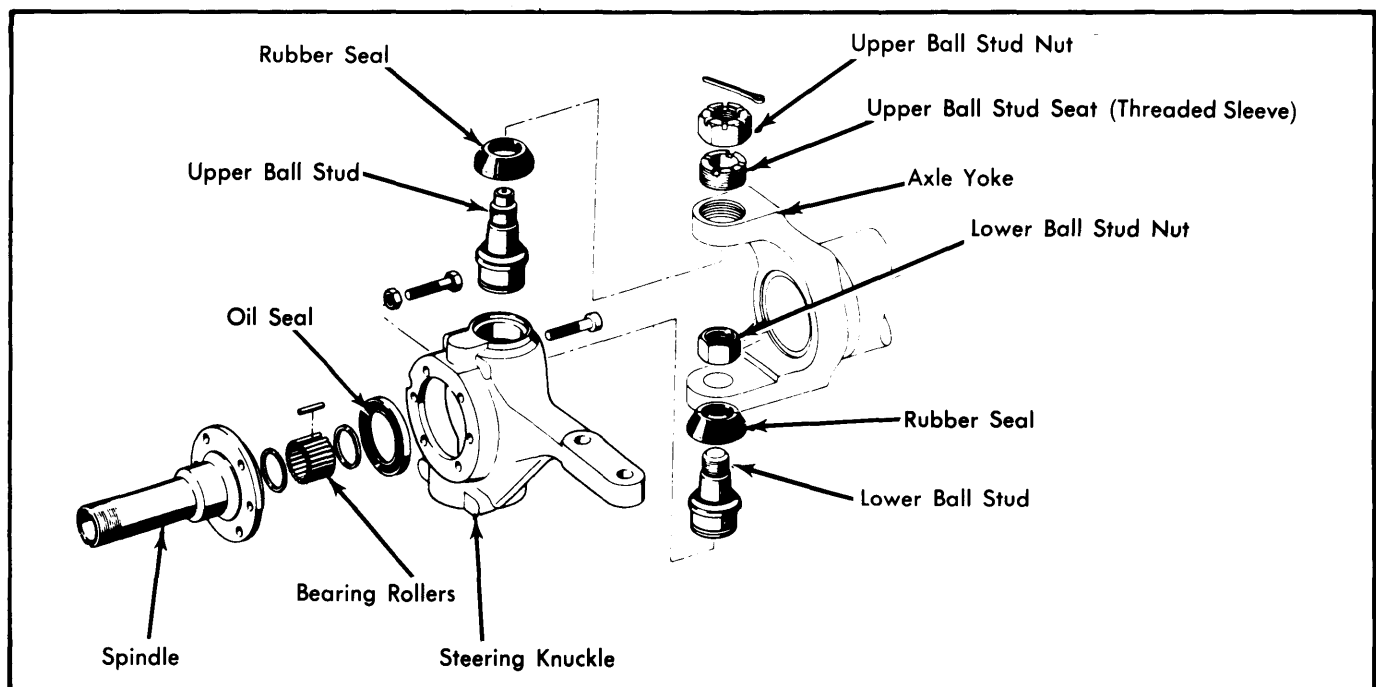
Exploded View of Ball Joint Type Steering Knuckle Assembly
